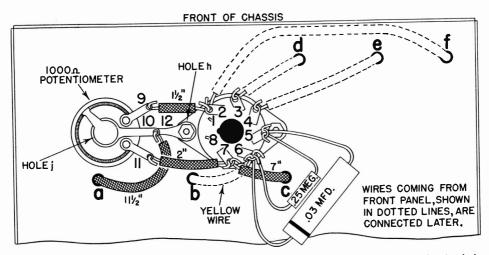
Bottom view of chassis, showing preliminary assembly of leads and wires. After the chassis is bolted to the panel, four wires from the panel will be run through holes b, d, e and f and connected to terminals 6, 3, 4 and 2 respectively, as indicated by the dotted lines.
